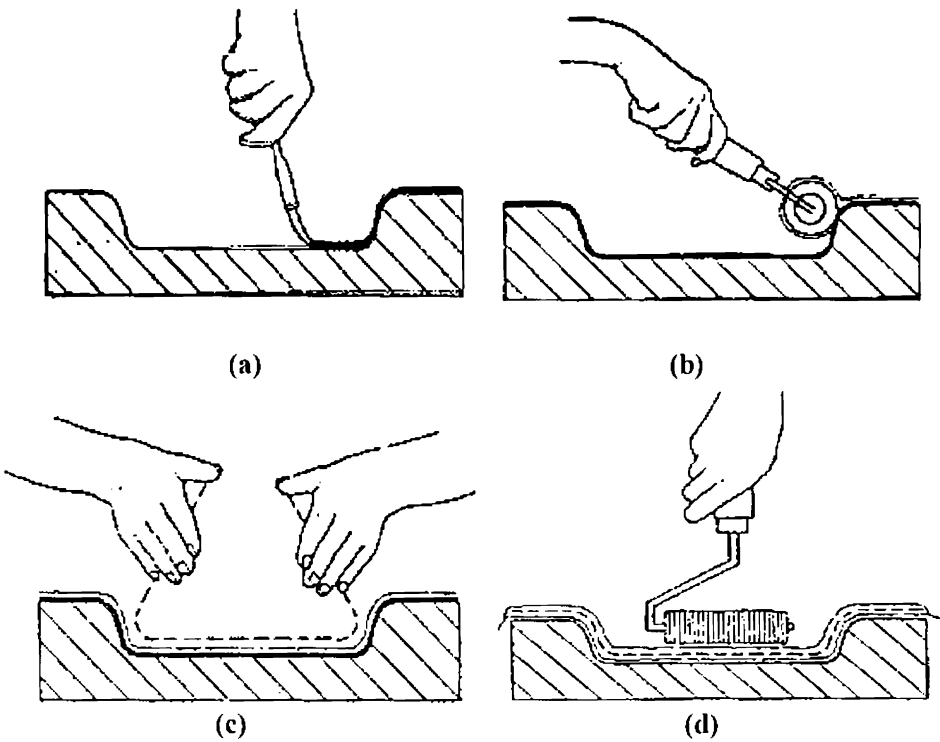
Hand lay up (a) apply gel-coat with brush (b) apply laminating resin with roller (c) cut and fit reinforcement layer (d) consolidate with ribbed roller
